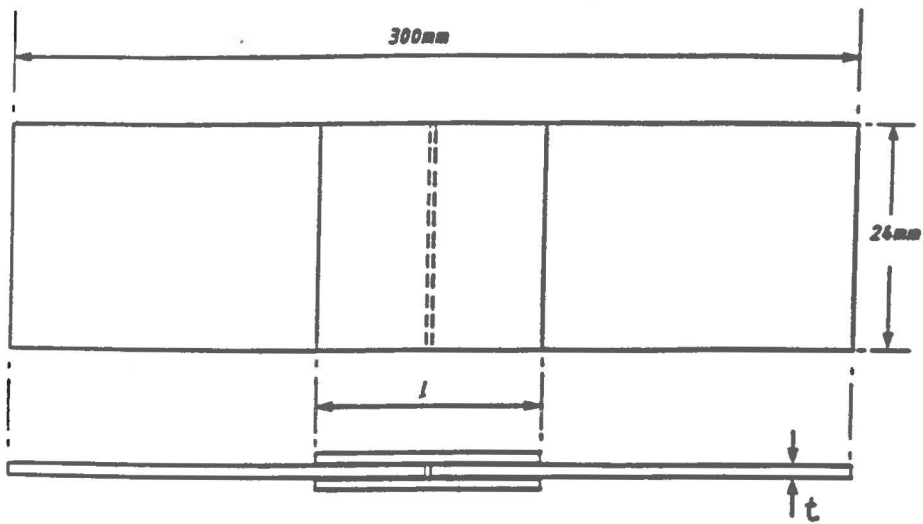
Joint detail tested with adhesive-bonded joints (S-N tests)
